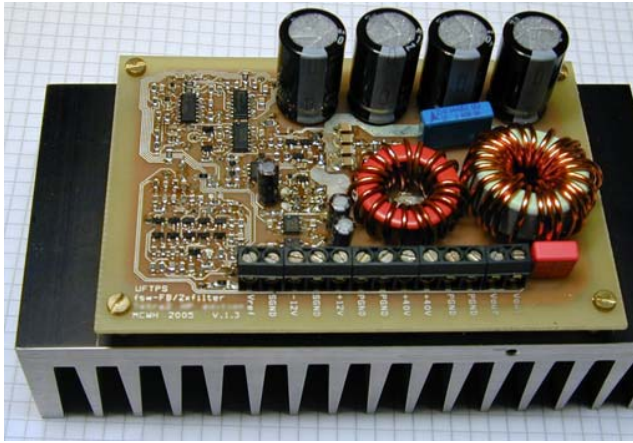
Prototype tracking power supply as implemented on 2-layer PCB. The TO-220 power devices are mounted on the PCB bottom side.
